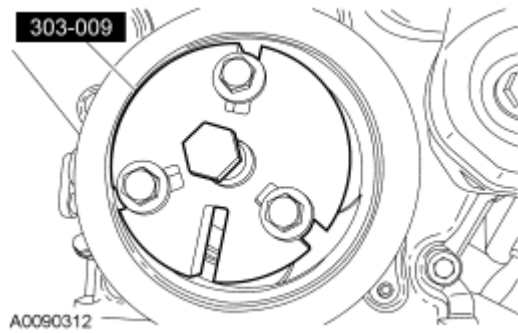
Removing Crankshaft Pulley Using Special Tool (303-009)
